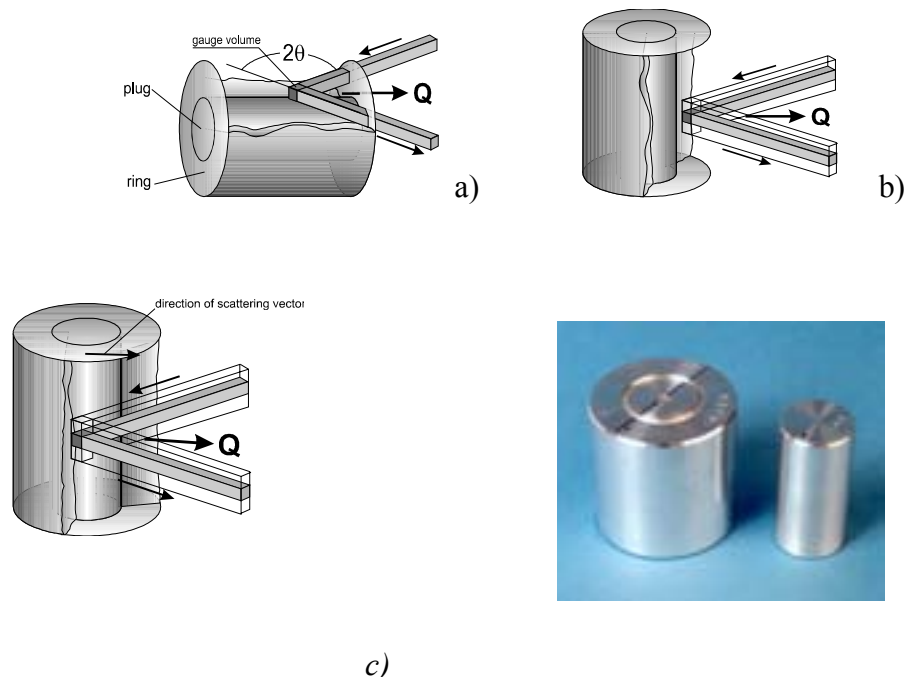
Schematic diagrams and photograph of ring and plug assembly a) axial direction b) radial direction and c) Hoop direction.
